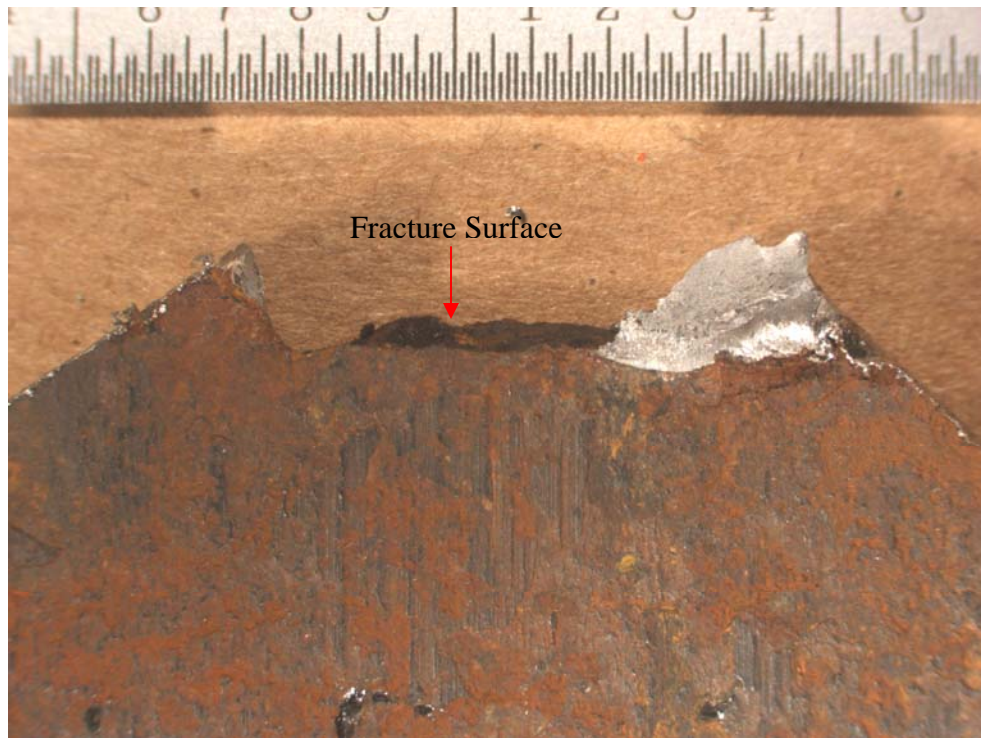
Stereoscope image of the inner surface of the cylinder section containing the fracture surface. Magnification 65X
